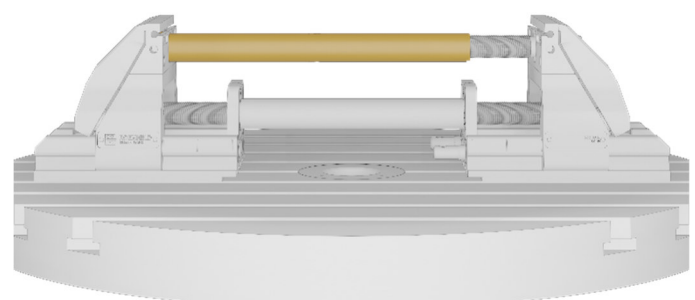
Inserting the tension spindle and extended clamping nut (see )
